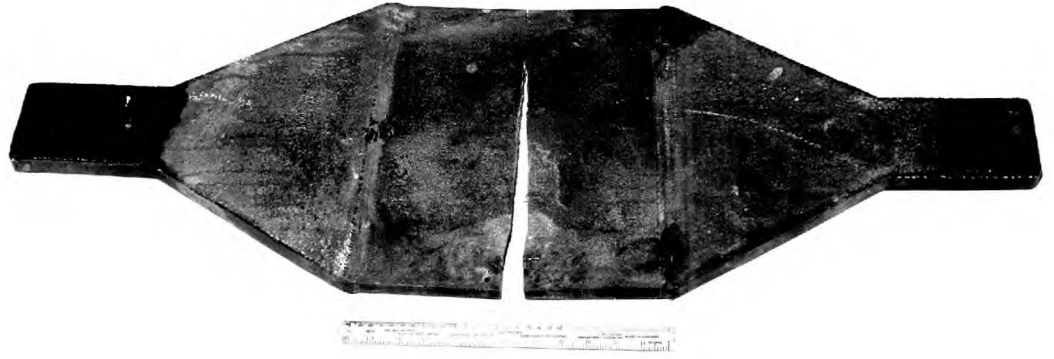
Specimen as used in the 100 ton Avery machine containing an arrested fracture.
